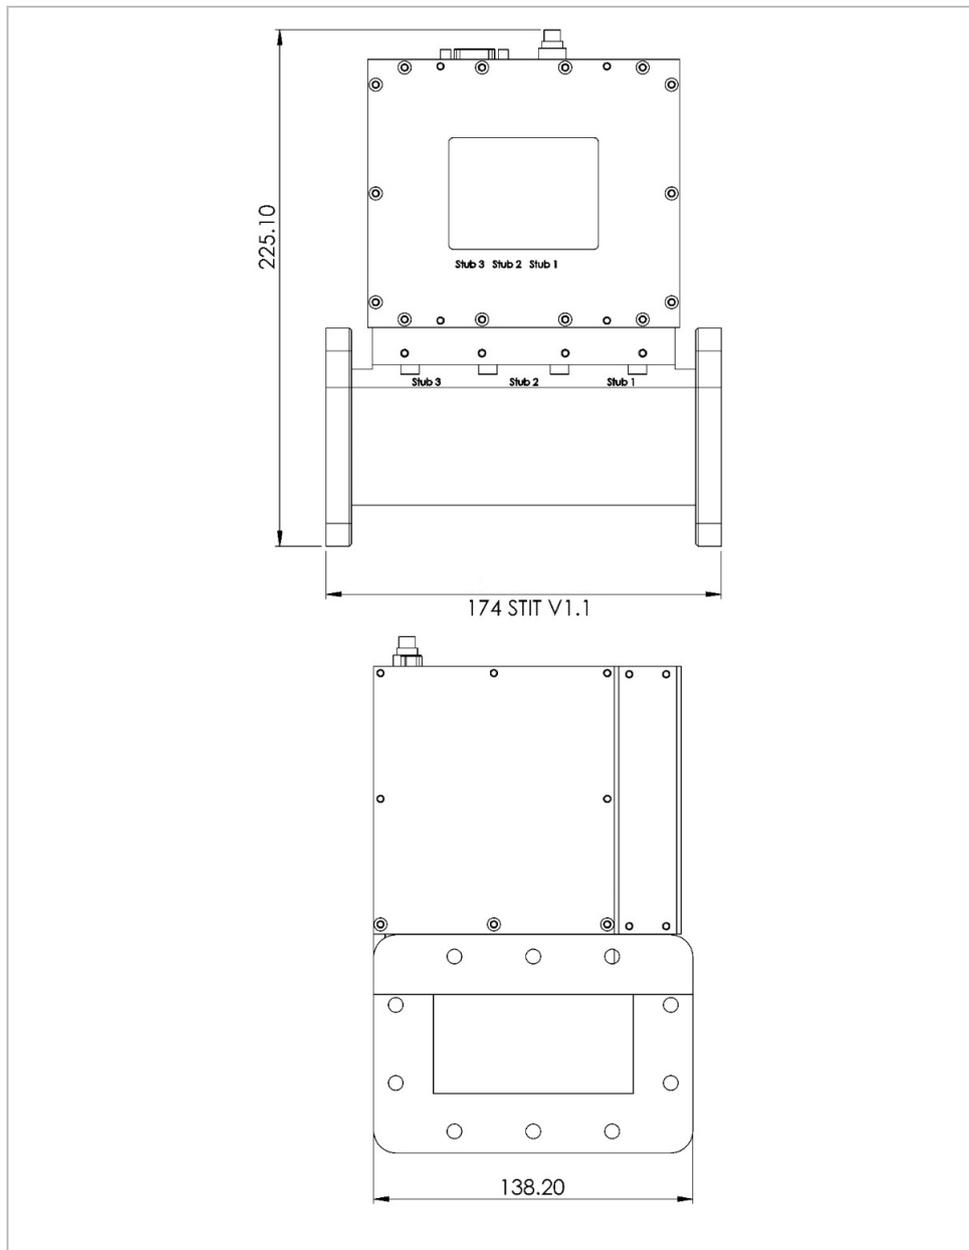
Basic STIT 1.1 dimensions in millimeters.
